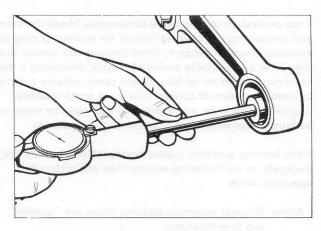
Measuring Connecting Rod Bushing Diameter
